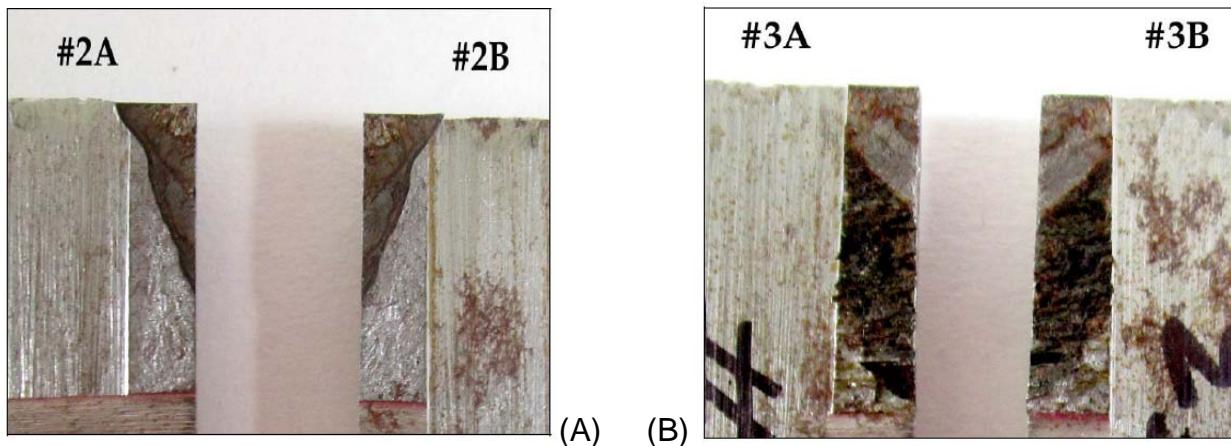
(A) View of fracture surfaces on Core#2. (B) View of fracture surface on Core#3
